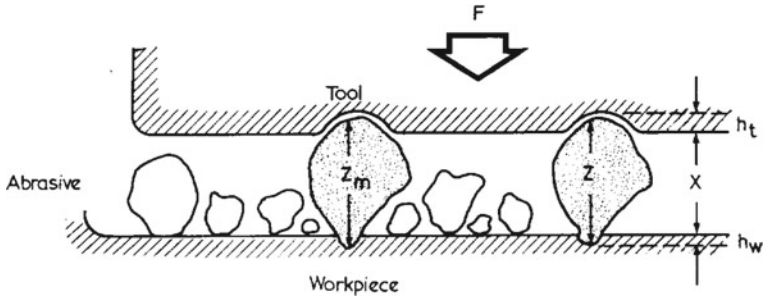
Abrasive particles in the space between tool and workpiece (reprinted from Kazantsev and Rosenberg [80] with permission. © Elsevier)
